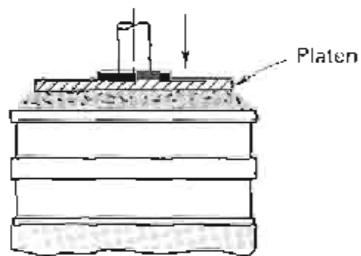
Squeezing a sand-filled mold section. While the pattern is on the bottom, the highest packing will be directly under the squeeze head.
